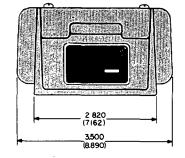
KA 39 VOLTAGE CONVERTER OUTLINE AND MOUNTING DRAWING (DWG. NO. 155-5076-00 R-0)
